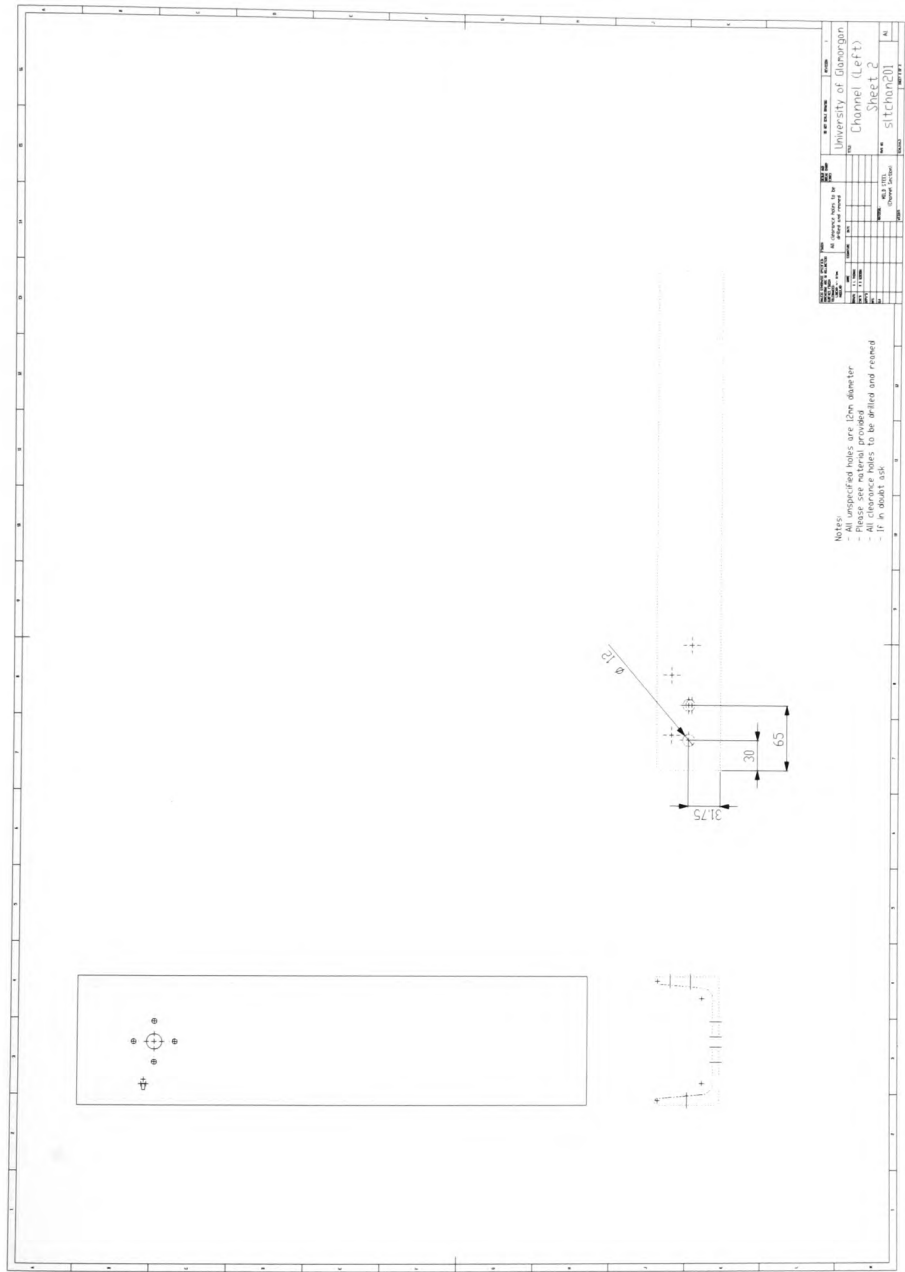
Manufacturing drawing of impact rig left hand strut (sheet 2)
